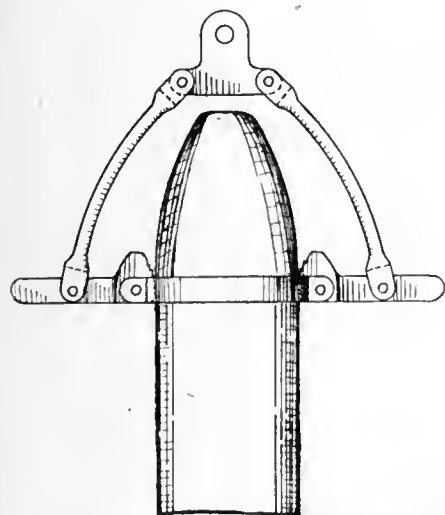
AUTOMATIC LIFTING CLAMP FOR PLACING FORGINGS ON ARBOR, SHOWN IN FIGS. 5 AND 7.
